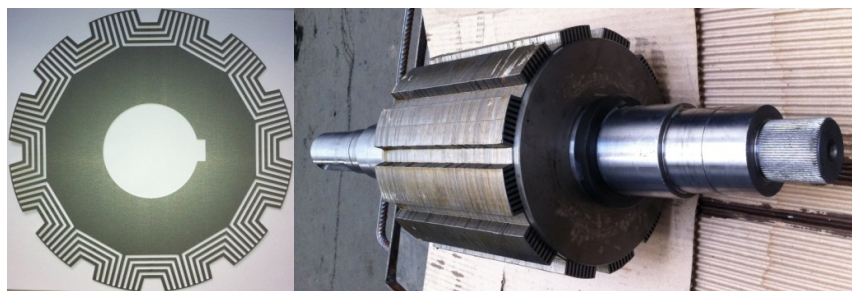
Rotor lamination sheet (left) and assembled rotor (right)
